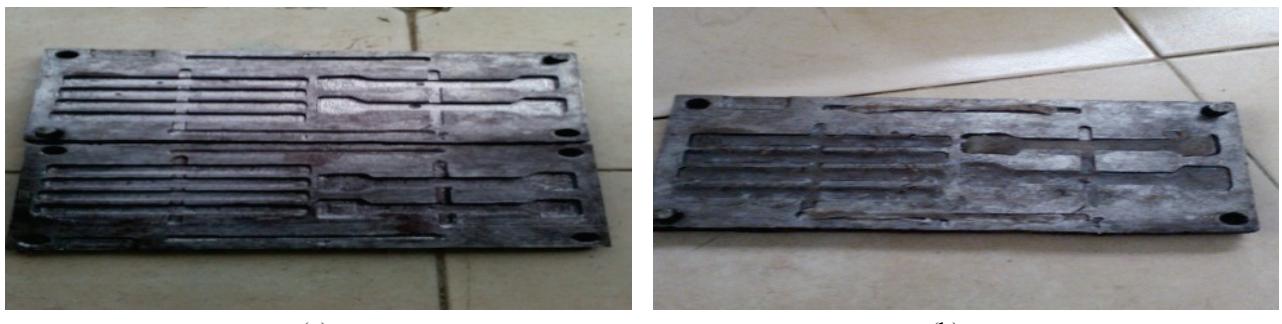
(a) Mold used and (b) Composite mixture in the mold
